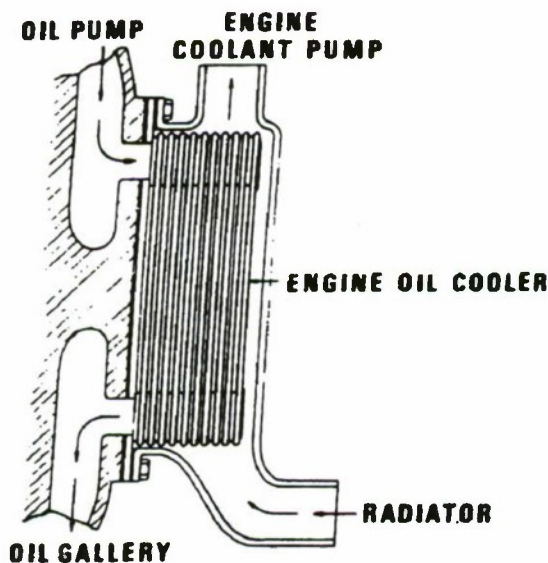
Integral Engine Oil Cooler (Ref. 27) (Release granted by Society of Automotive Engineers, Inc., Paper No. SP-284)
